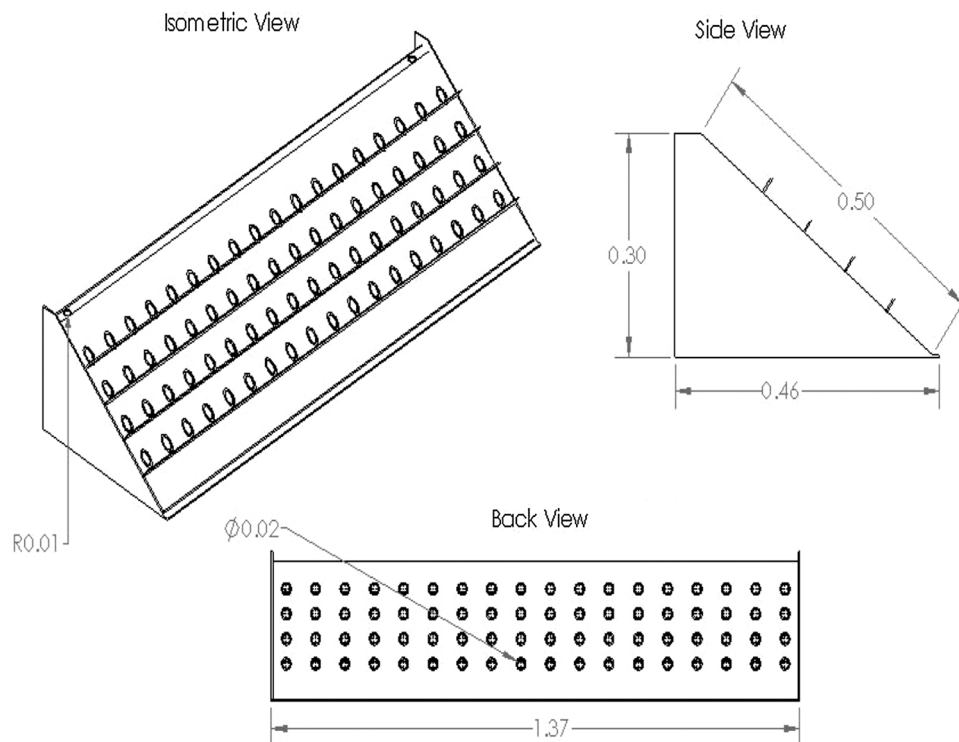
Dimensions of Unit 1 (1.91 cm Diameter Pipes).
